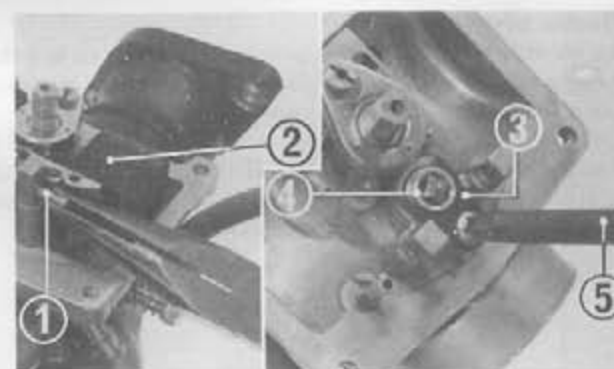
(1) Float pin (2) Float (3) Valve seat set plate (4) Valve seat (5) Plus screwdriver
